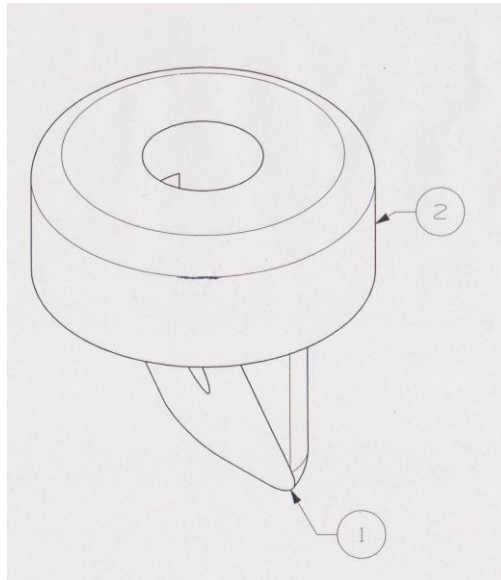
Sharpener assembly consisting of the sharpener (1) and the cap (2)
